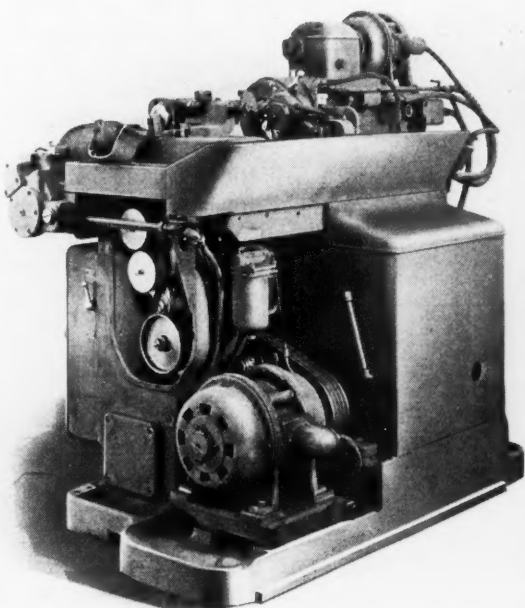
Rear View of Internal Grinder, Showing the Drive to the Wheel-head
